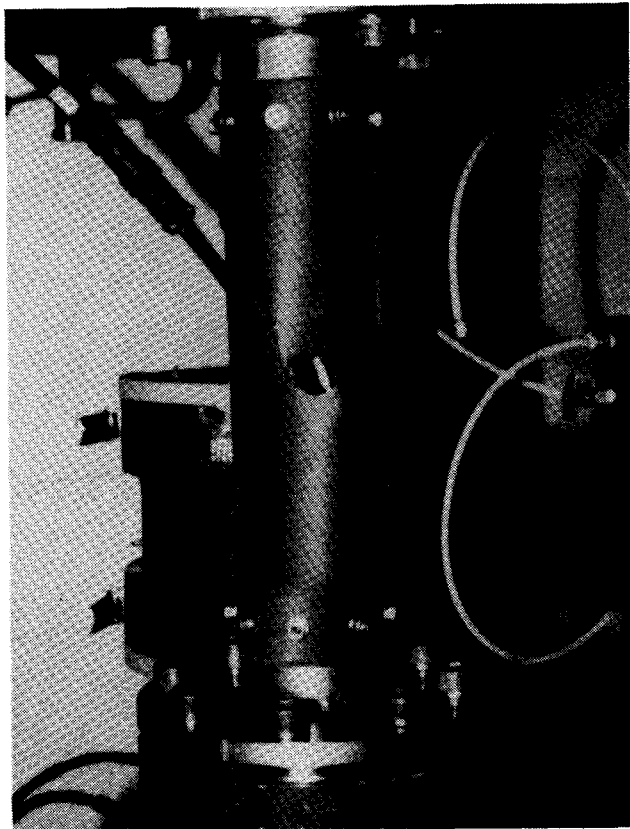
Typical failure mode for specimen L#2 with 25.4 mm diameter hole.
